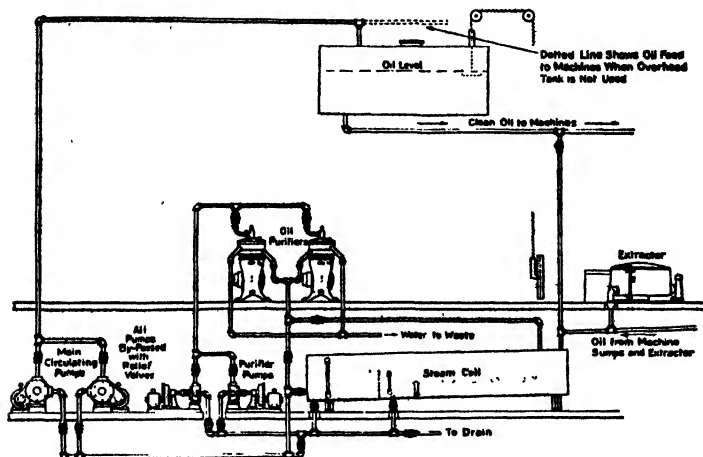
A typical installation for purifying cutting oil from machines to clean oil supply tank. (*The De Laval Separator Company and The Texas Company*)
